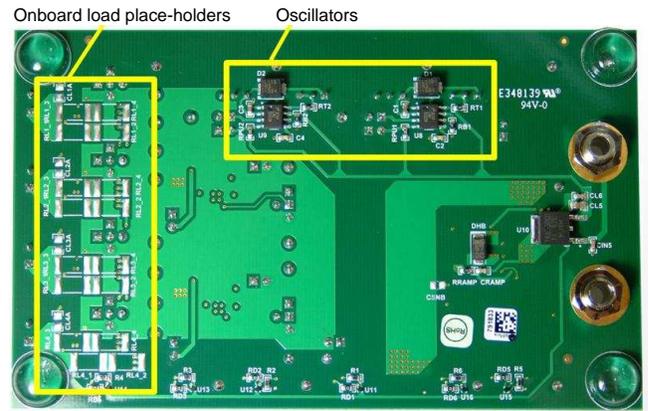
Board Bottom View—Oscillators, Onboard Load Option
